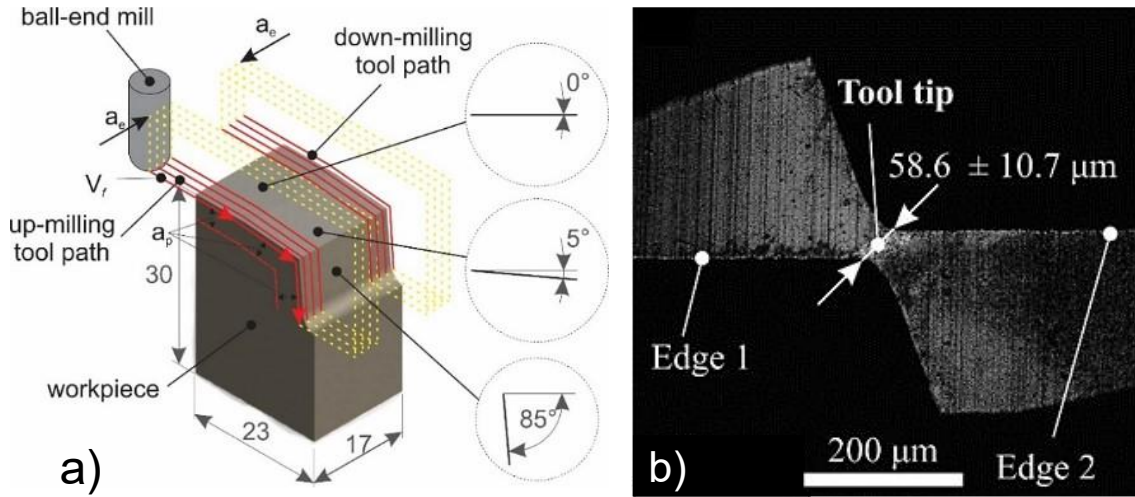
Workpiece geometry and tool path; b) tooltip, adapted from Basso et al.(2022).
